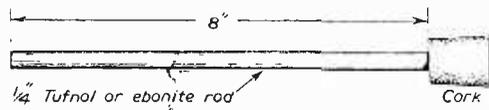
A useful device for valve checking. The cork should be firmly fixed to rod and covered with rubber finger-stall.
